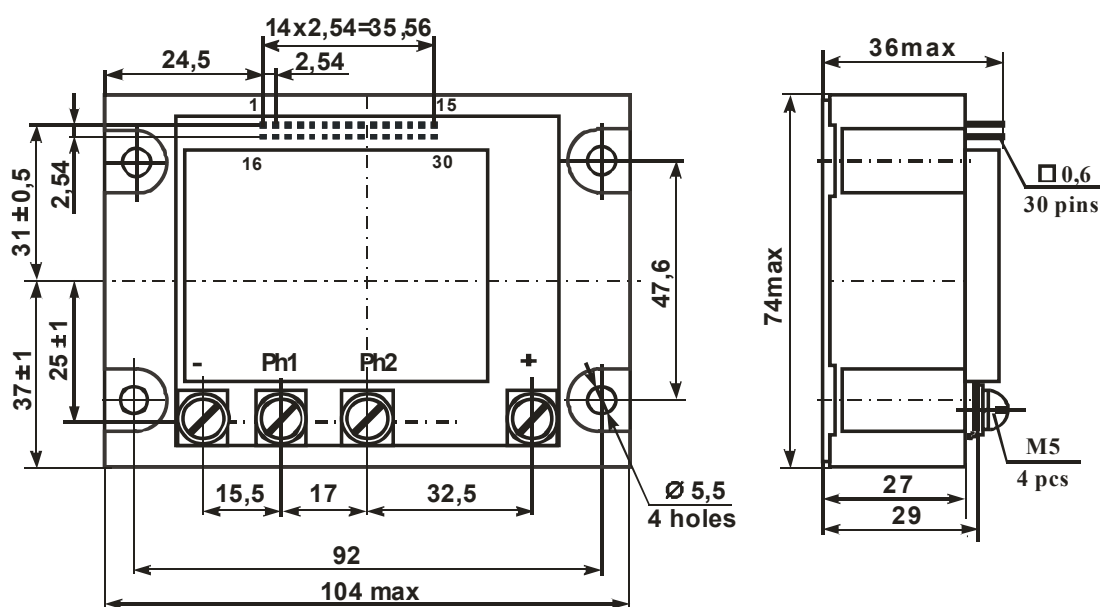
Overall dimensions of BDCDMM -20,30,50,70,100-1,2,6 and BDCDMM-5,10,20,30,50-6,12 power assembly type «4»
